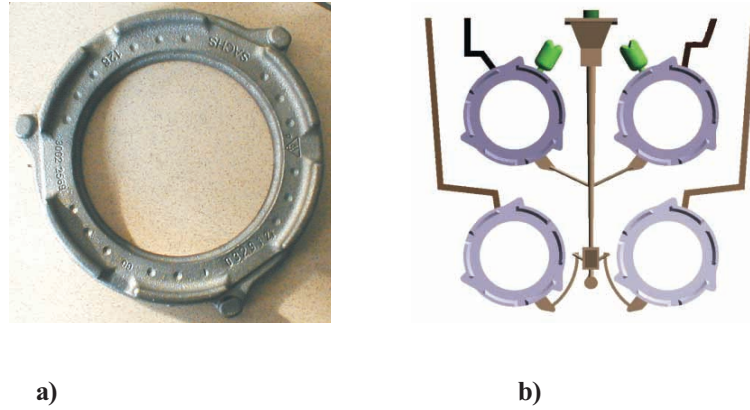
Ring casting: a) detail picture; b) feeding system with castings 3D model
